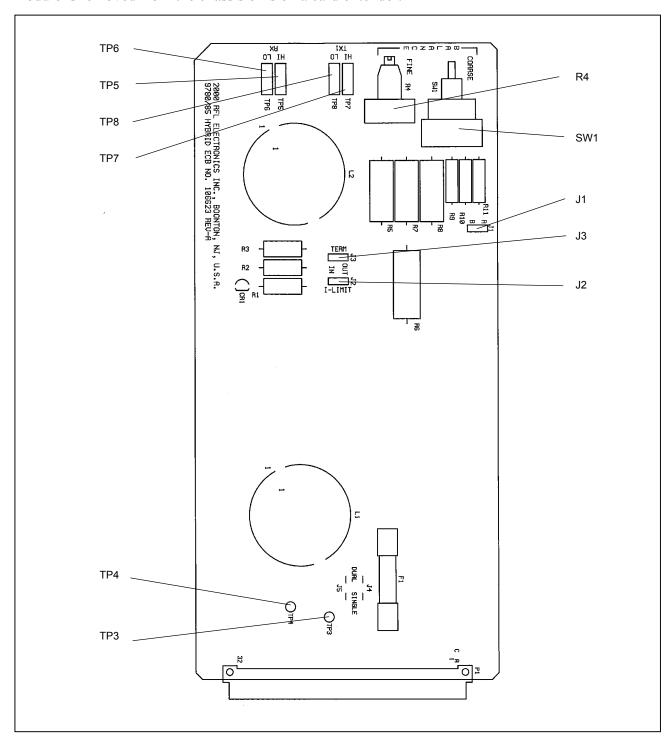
Controls, indicators, and component locations, Skewed Hybrid Module
